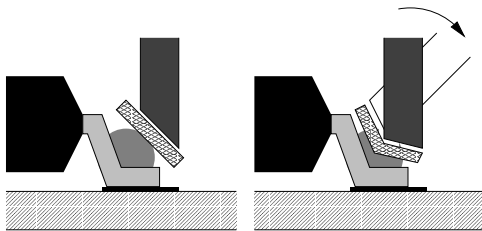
If the desoldering wick touches the pins only gently (left), it may not make enough contact to melt and remove the solder. Therefore, push against it with the soldering iron, to bend and press it against the pins (right).
